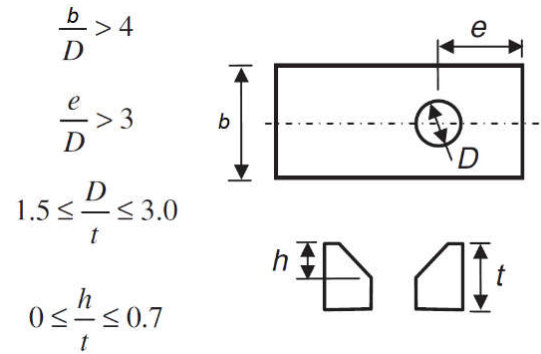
Specimen design for bearing failure mode (Maajid *et al*, 2012)
